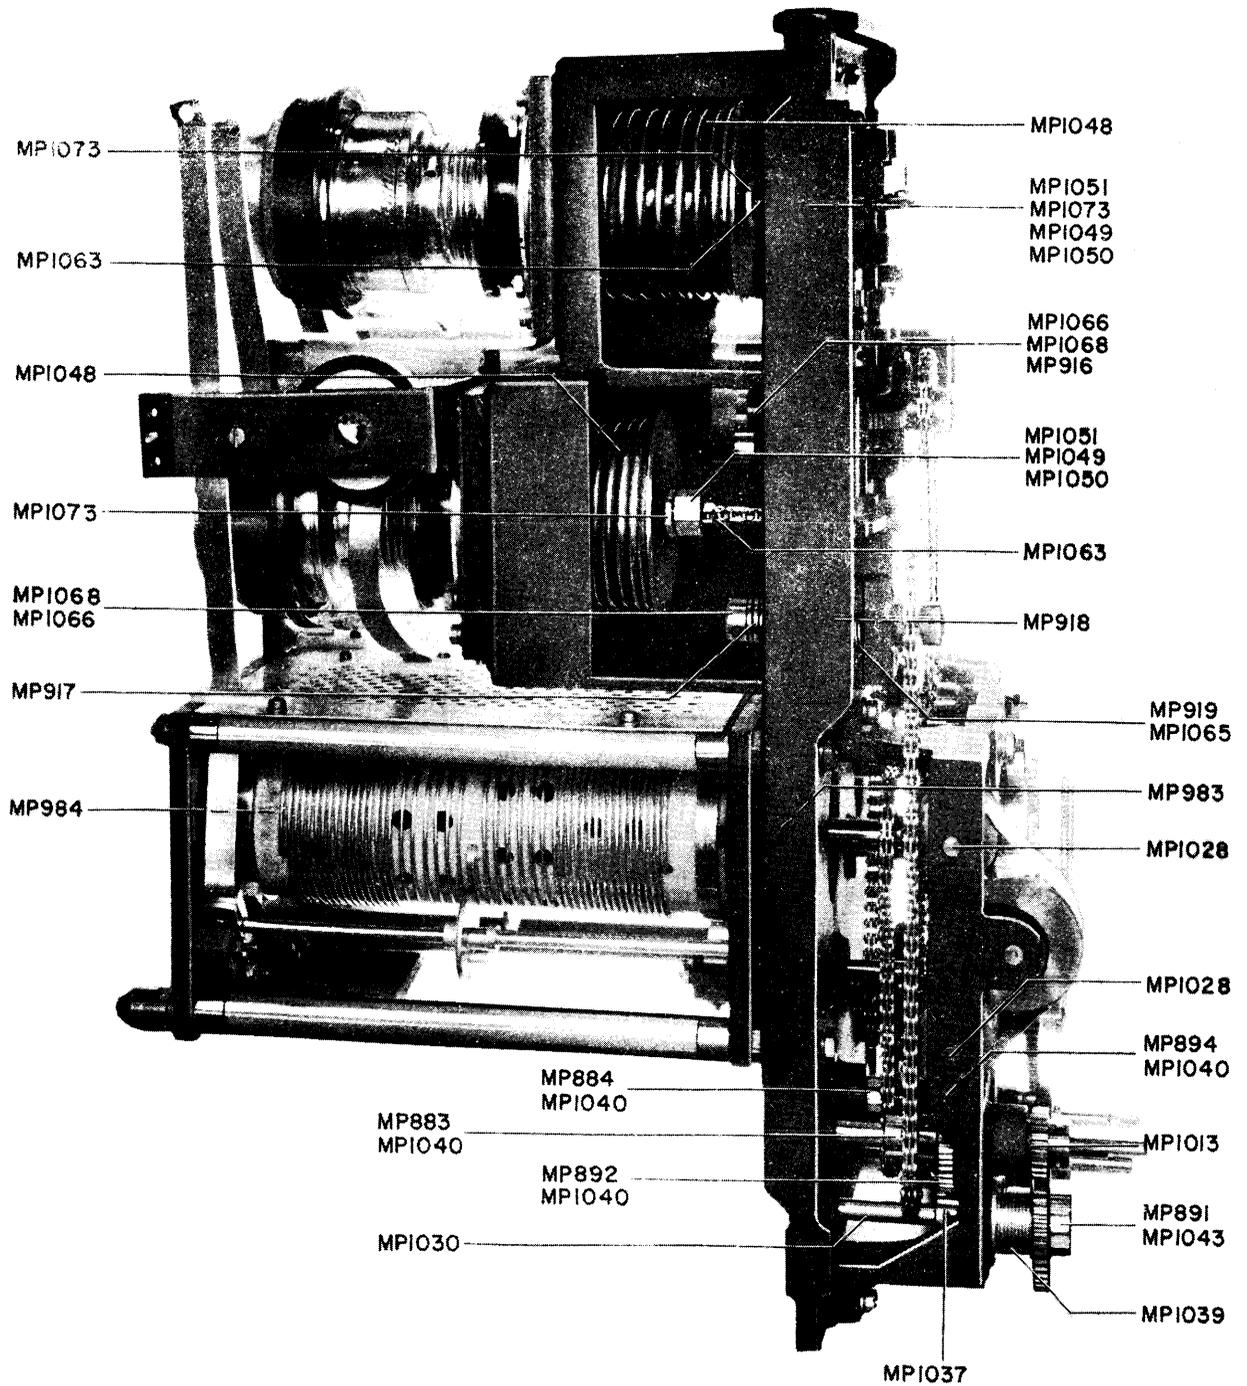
Tuning and Coupling Mechanism, Location of Parts on Left-hand Side
